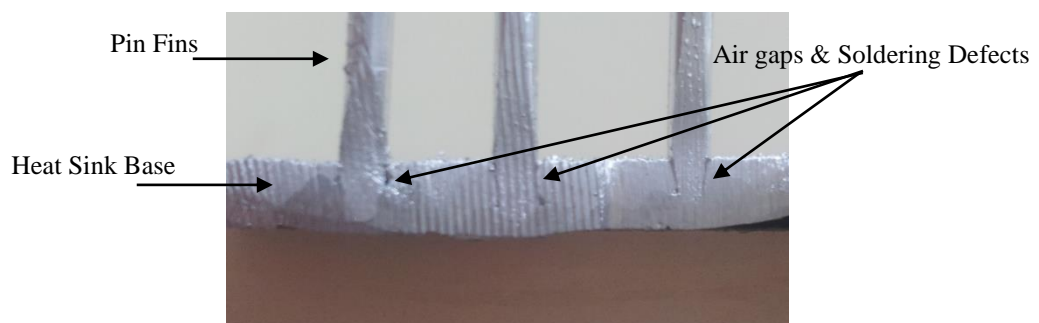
Detection of pin fin soldering zones at the base of heat sinks
